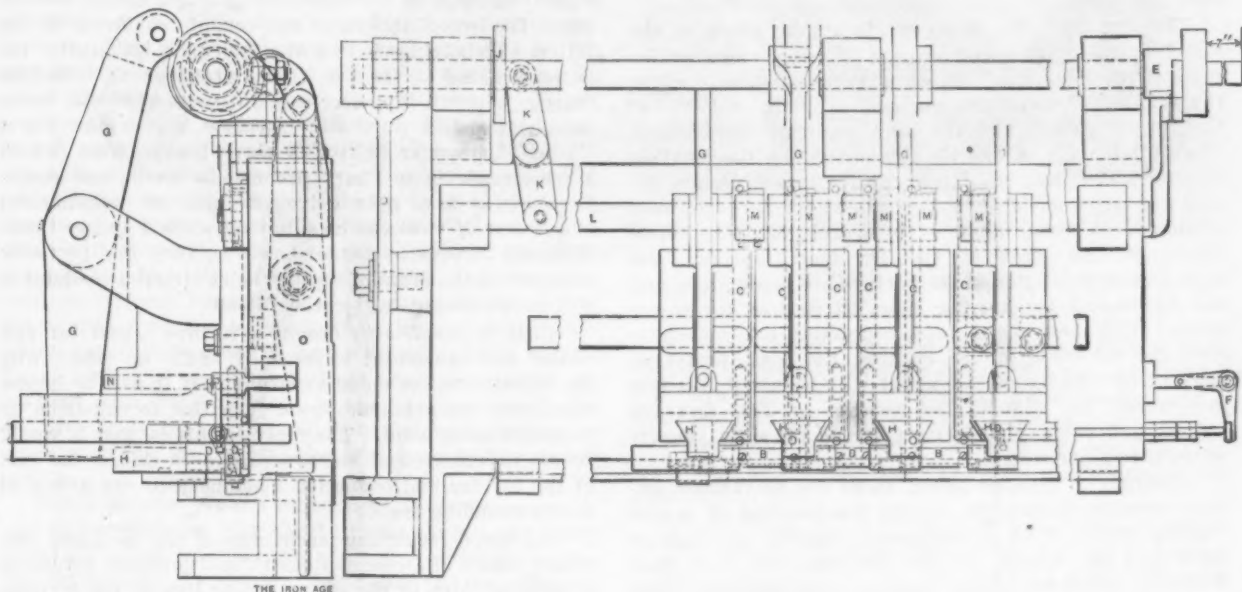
End Elevation and Plan, Showing Mechanical Details.
